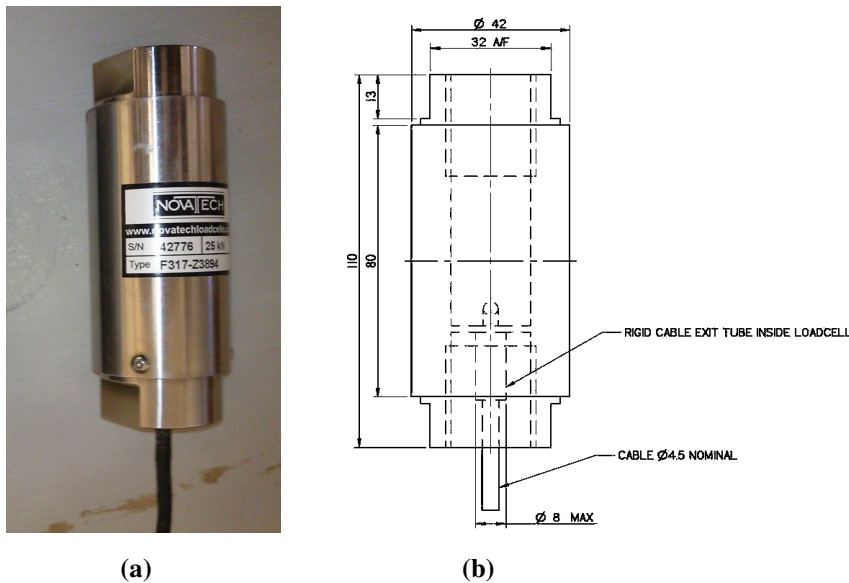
Pre-cast pile base loadcell (a) awaiting installation in the pile and (b) cross-section dimensions in mm (Novatech Measurements Ltd)
